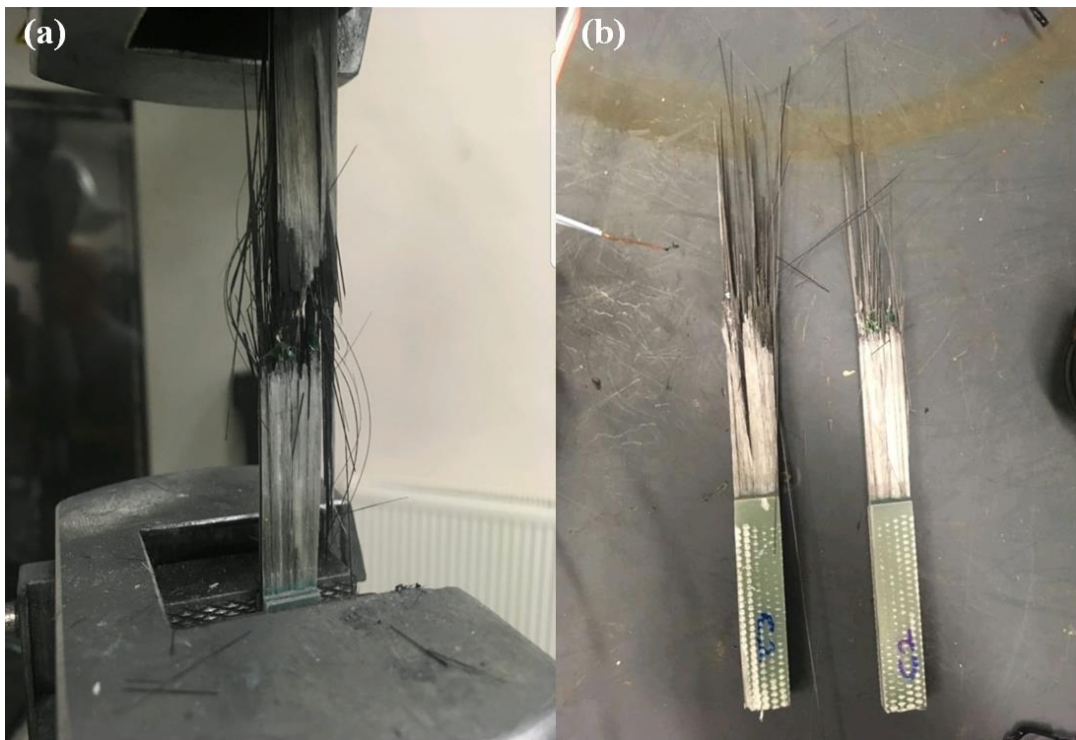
(a) Failure of longitudinal tensile specimen (b) Fracture surface of Coupon 2.
